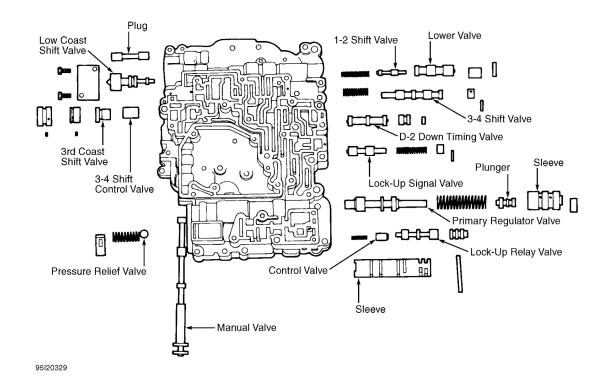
Exploded View Of Lower Valve Body Components Courtesy of MITSUBISHI MOTOR SALES OF AMERICA.
